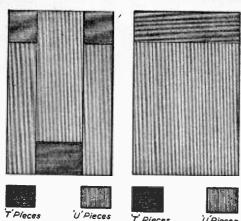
(left).—Block assembly. Fig. 4 (right).—Butt assembly.
